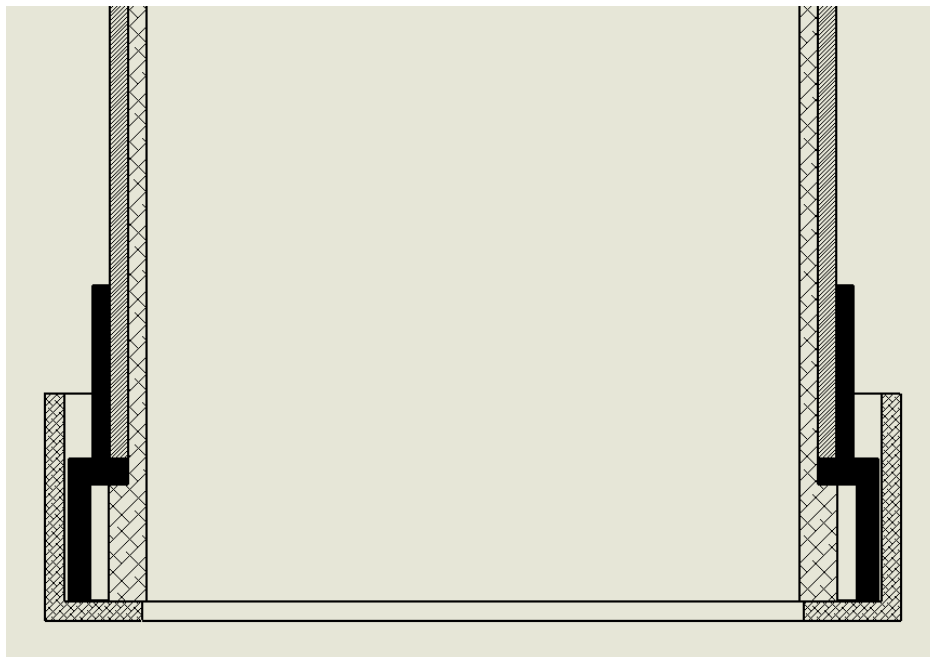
Section view of the Aeropack motor retainer parts, that shows how they interact with the motor tube to hold it in place.
